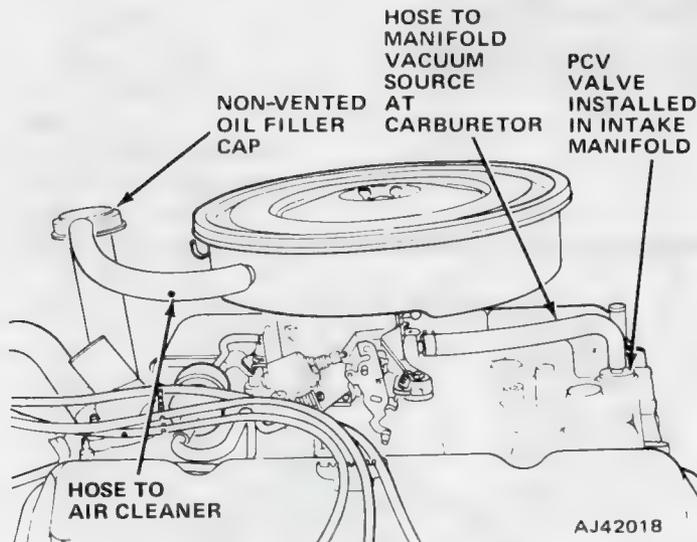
J-126 PCV System—Eight-Cylinder Engine
